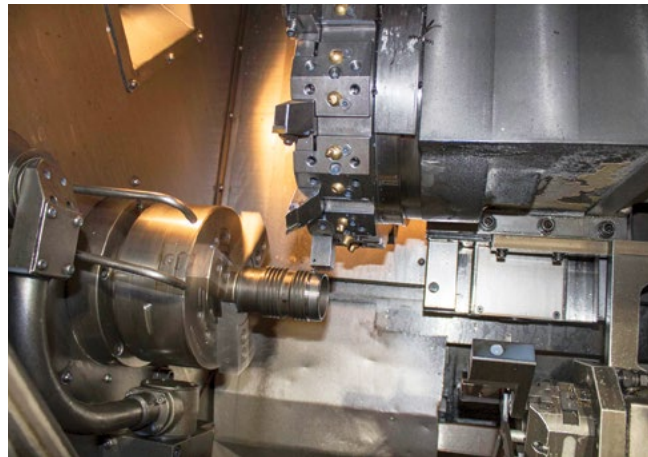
A CNC-controlled lathe machines a shotcrete nozzle body. This lathe has eight tools in its magazine and can load steel blanks and unload finished parts automatically. Normally, the part would be covered in a stream coolant during machining. This nozzle body begins as a piece of steel tubing and has all its features machined into it. Additionally, these nozzle bodies are case-hardened after machining
